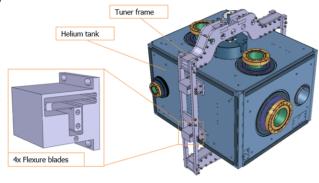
Improved Tuner design with flexural links to Helium Vessel.
